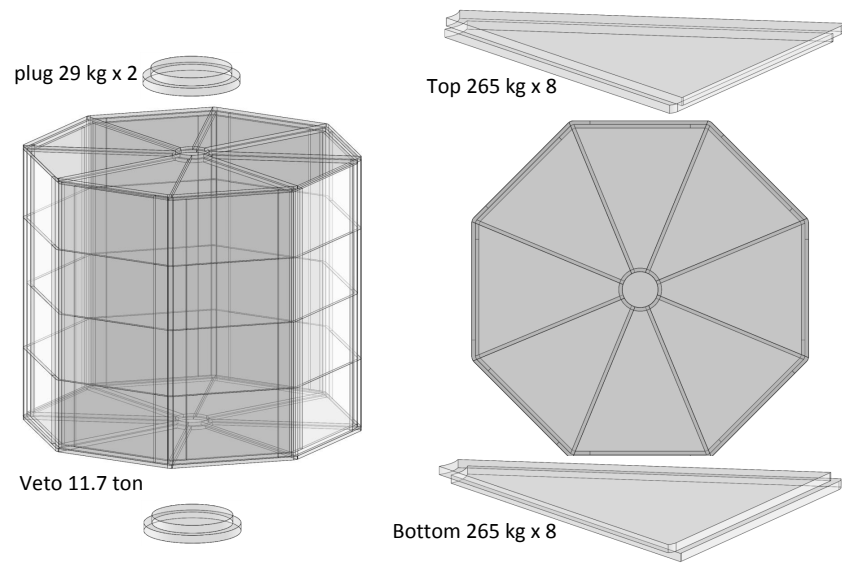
Preliminary design of the panels of acrylic loaded with Gd. These drawings should be considered as a starting point for a discussion. Detailed drawings will be provided later.
